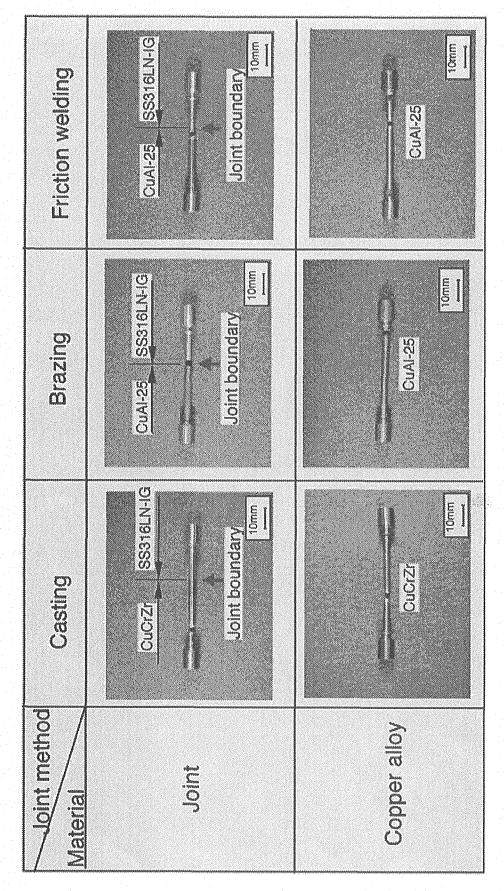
Photographs of un-irradiated specimens after tensile test at 150°C.
